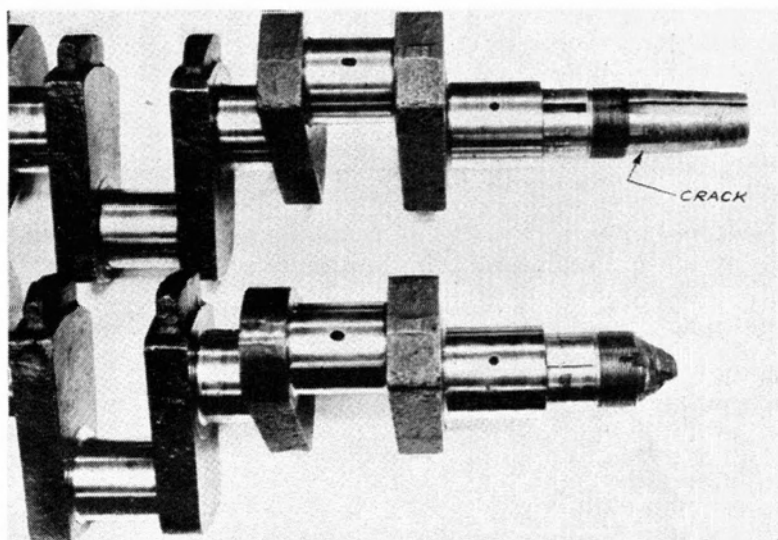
TWO DEFECTIVE CRANKSHAFTS OF KERMATH ENGINES
